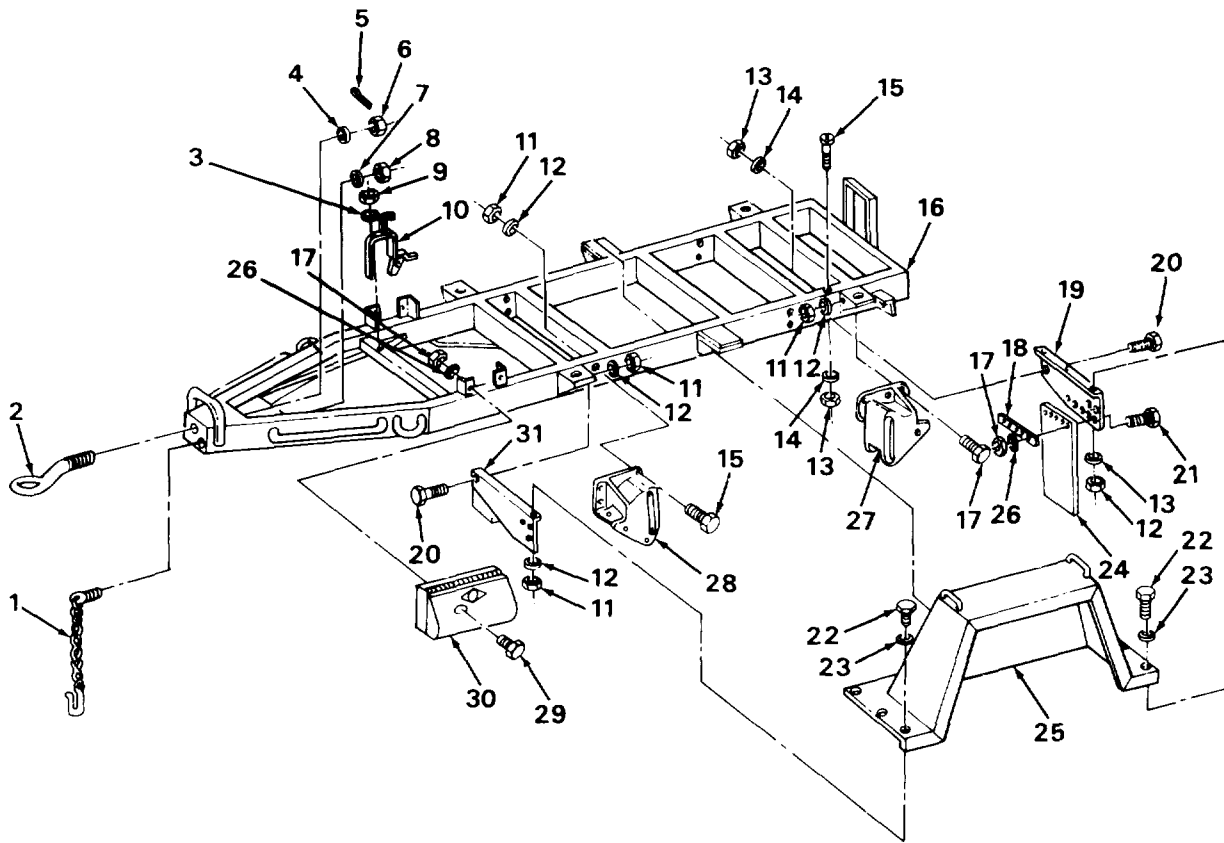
FRAME ASSEMBLY (M149A1 AND M149A2).
